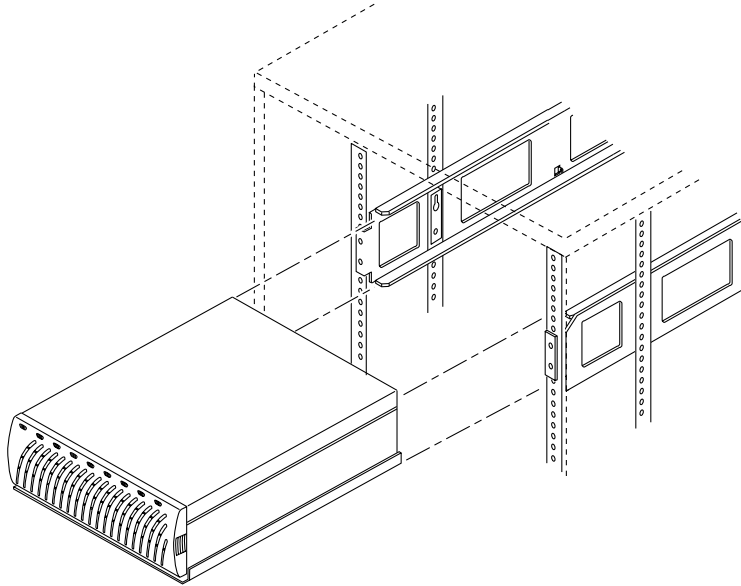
Aligning the Disk Tray Chassis and Baseplate With the Side Rails
